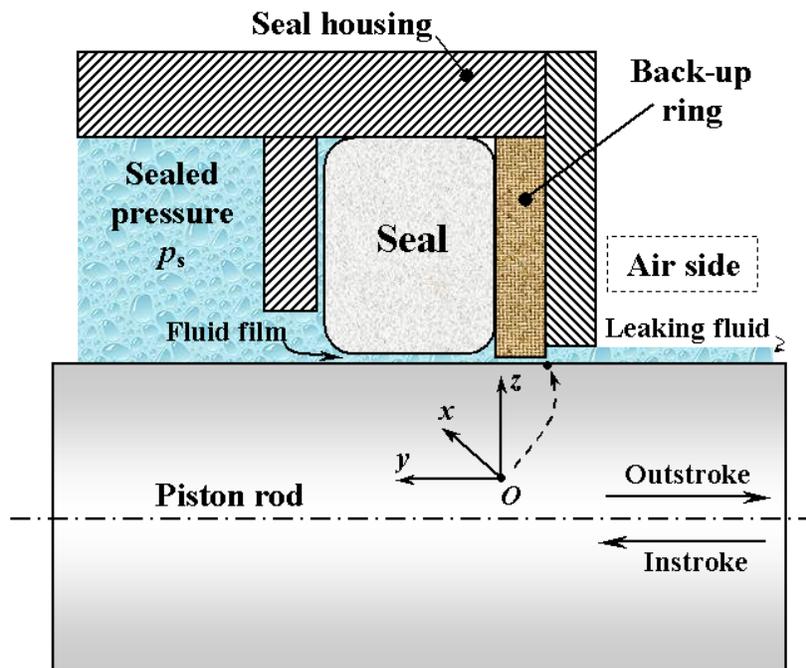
Schematic of rectangular elastomeric seal with back-up ring in a linear hydraulic actuator (only the upper half of the seal, ring and housing shown)
